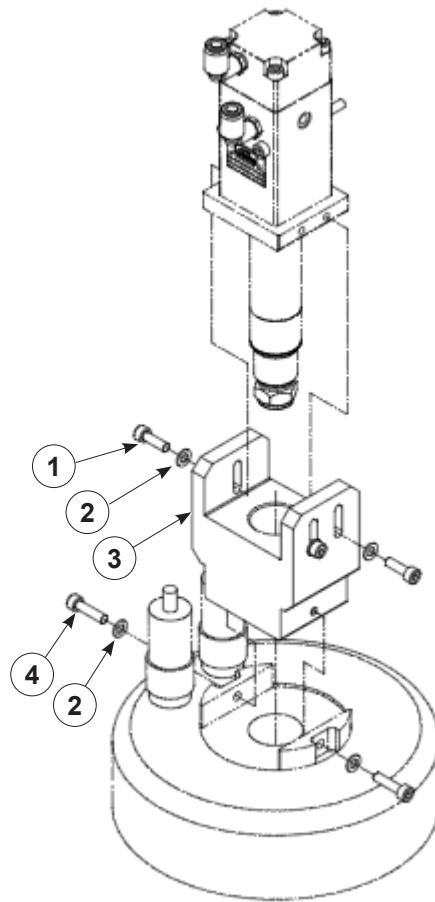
60, 125, and 200 mm Dispense Valve Mounting Kit
